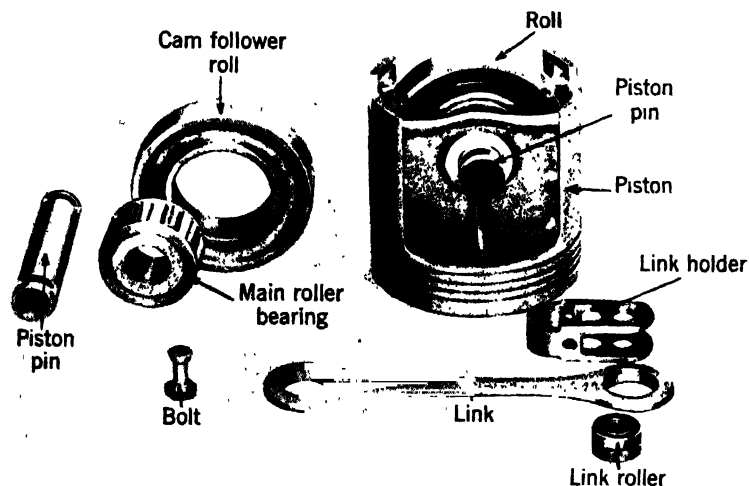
Piston and Roller Assembly and Details of Piston Roller Bearing, Link and Link Holder Parts of Caminez Engine.
